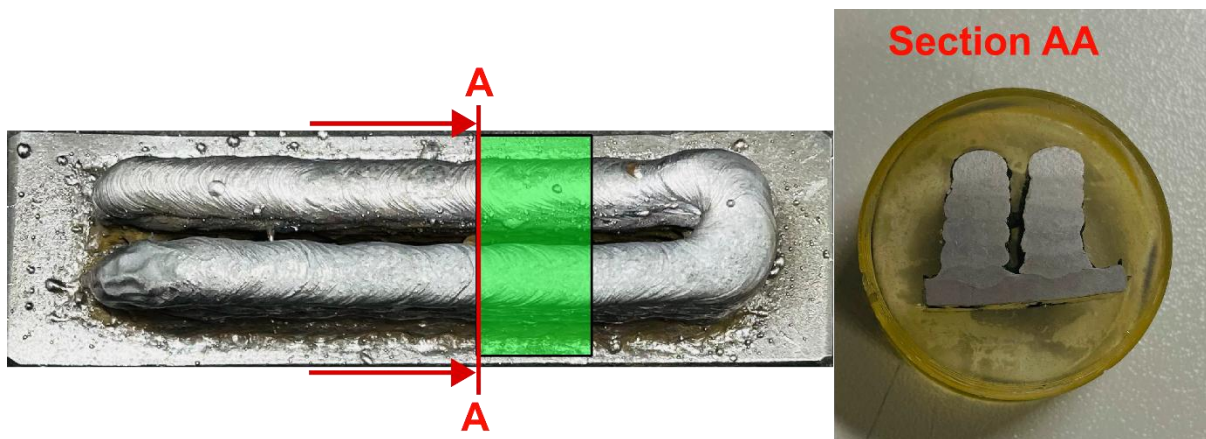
Multi-layer stacking samples (U-shape & Wall)
